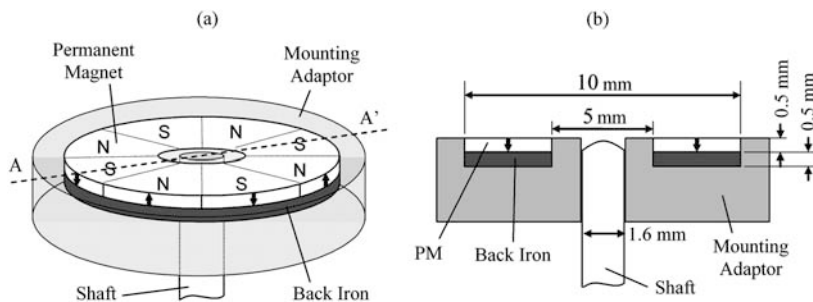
Schematic (a) perspective view and (b) cross-section of the PM machine rotors. Note that the rotor is shown upside down (Adapted from [64])
